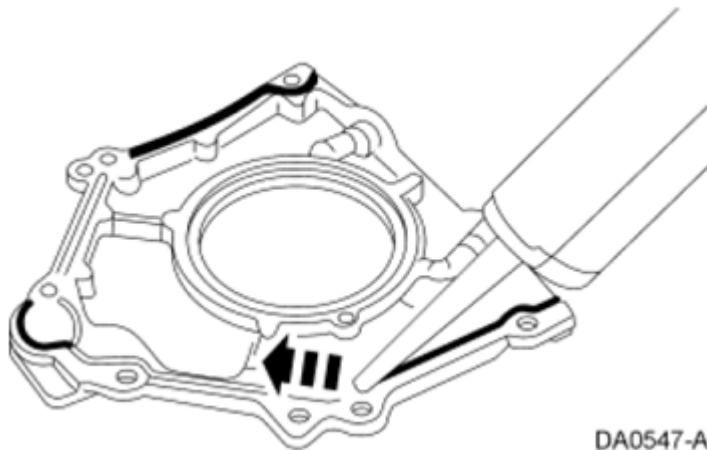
Applying Sealant Around Crankshaft Rear Seal Retainer Sealing Surface
